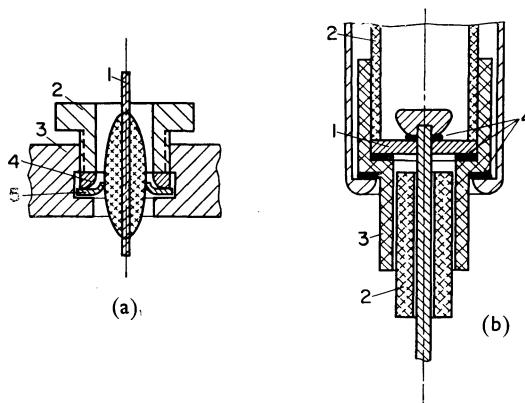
Lead-throughs sealed with flat metal gaskets: (a) seal with aluminium foil, (1) Kovar; (2) tubular screw; (3) vacuum chamber; (4) sealing ring; (5) aluminium foil (after de Villiers¹²⁶⁷); (b) seal with lead gaskets, (1) steel disc; (2) loose fitting glass tube; (3) porcelain or glass; (4) lead (Pb) gaskets. After Pockman⁹⁹⁵ (*Courtesy of The American Institute of Physics*)
